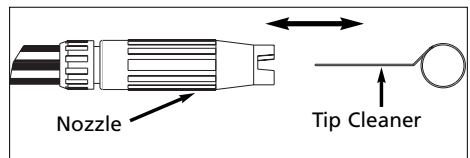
Insert tip cleaner in nozzle hole and move back and forth until debris is dislodged.
